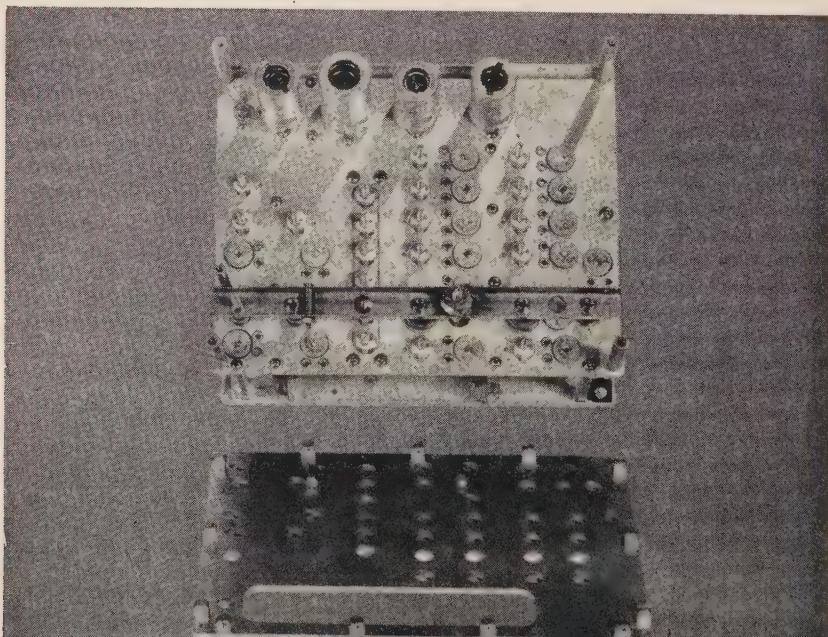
View of the r-f assembly showing wiring and all crystals installed.
